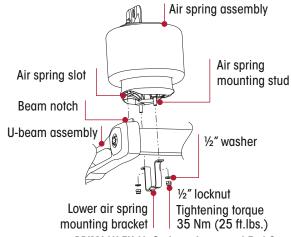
PRIMAAX EX Air Spring - Integrated End Cap
